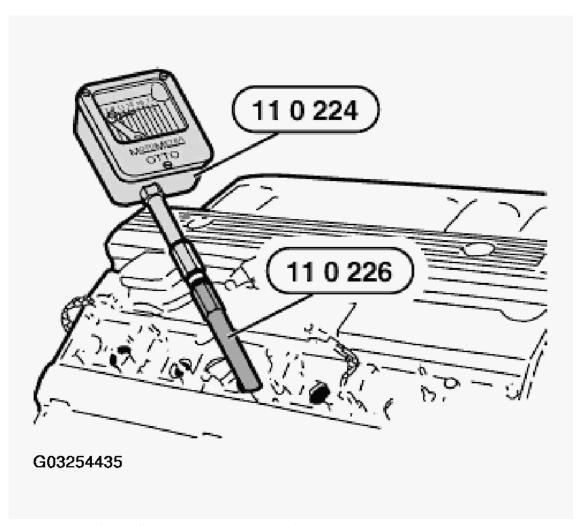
Checking Schrader Valve On Special Tool Courtesy of BMW OF NORTH AMERICA, INC.
